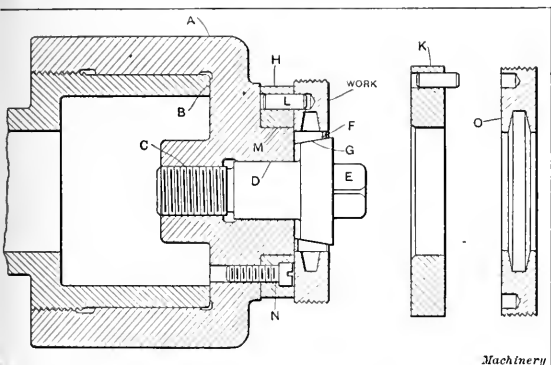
Arbor having Taper Plug which expands Split Bushing
